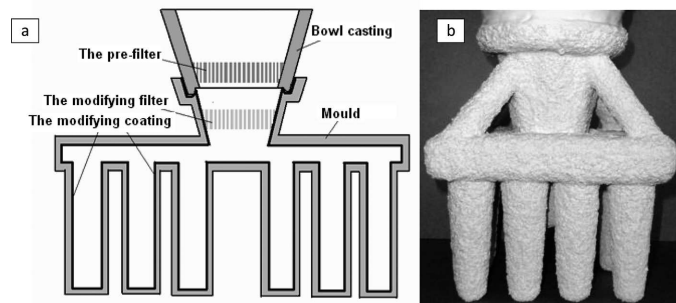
Schematic of the ceramic mould (a), assembled mould (b)
